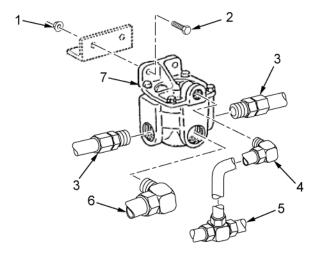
Location R, Pipe Sealant Compound to Male Threads Installation.
